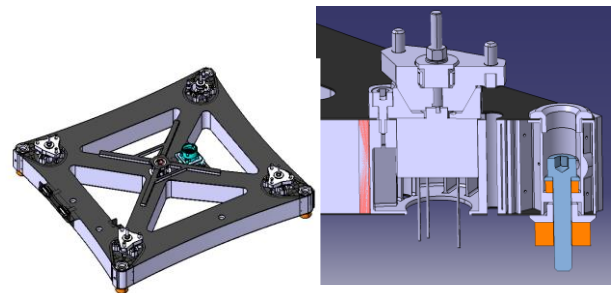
MECSS assembly (left) and sectional view of a corner insert
